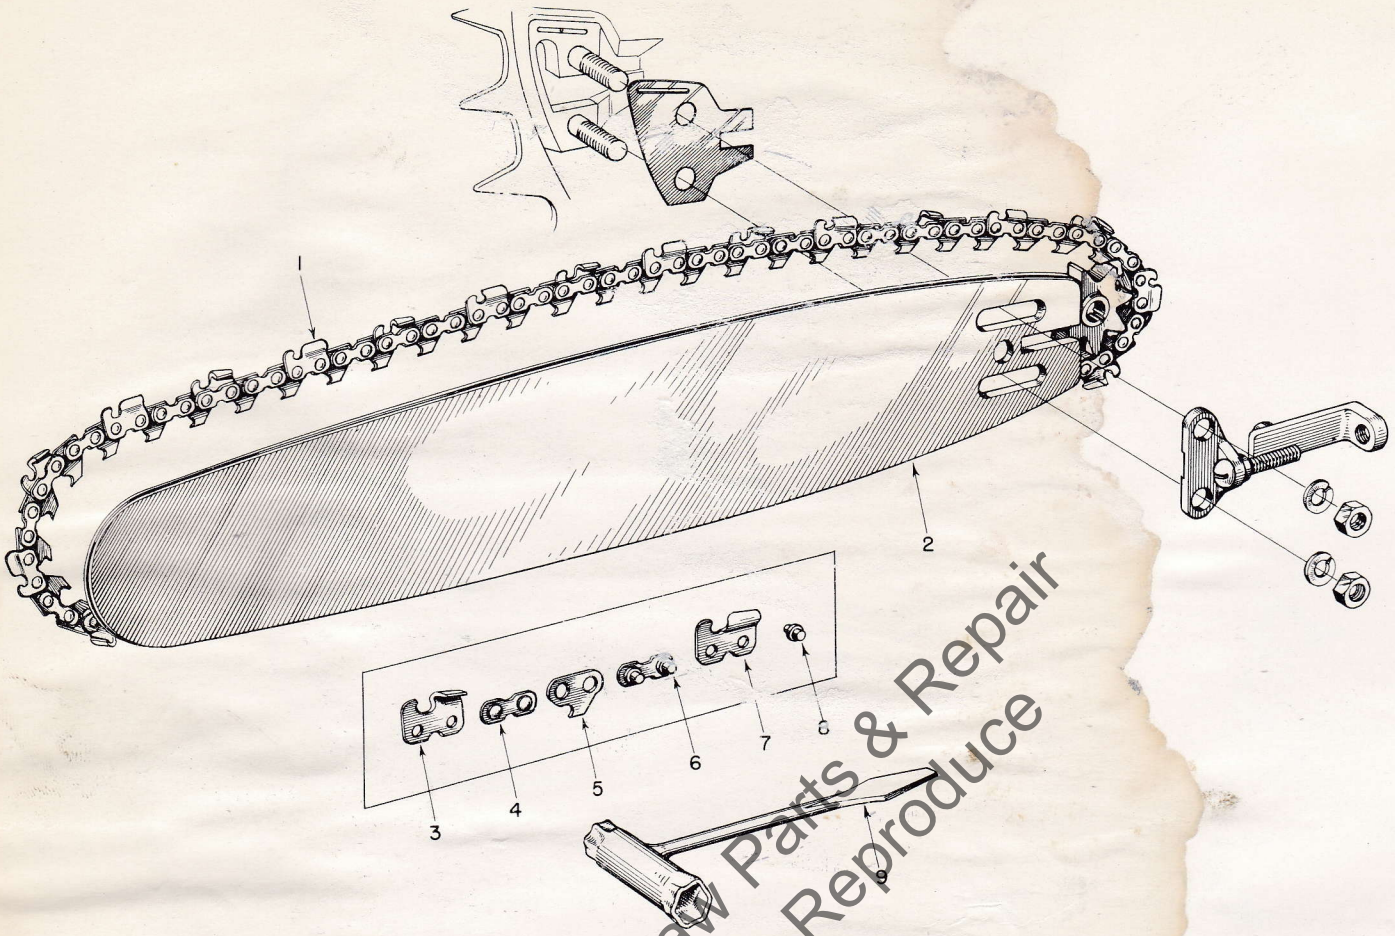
CHAIN AND GUIDE BAR PARTS
